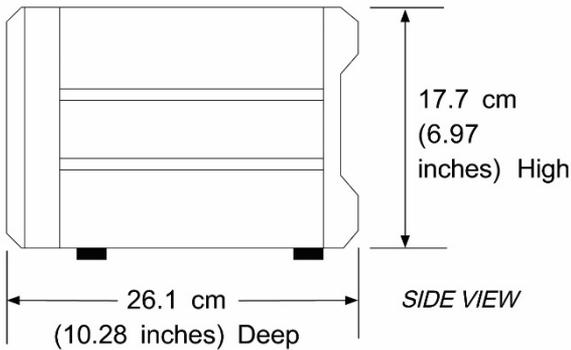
Model 2308-1 Enclosure Physical Dimensions
